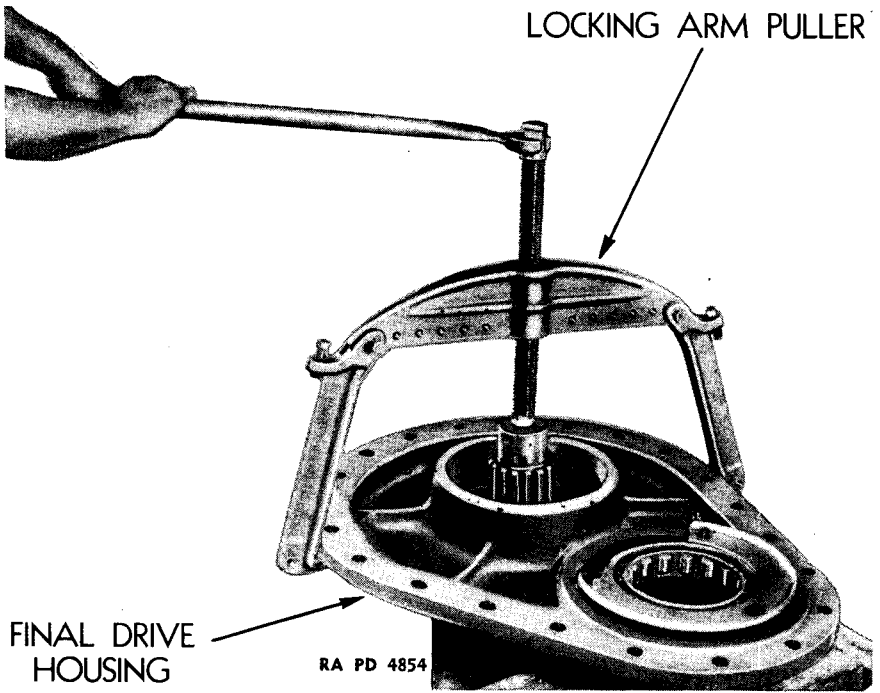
REMOVING FINAL DRIVE SHAFT
